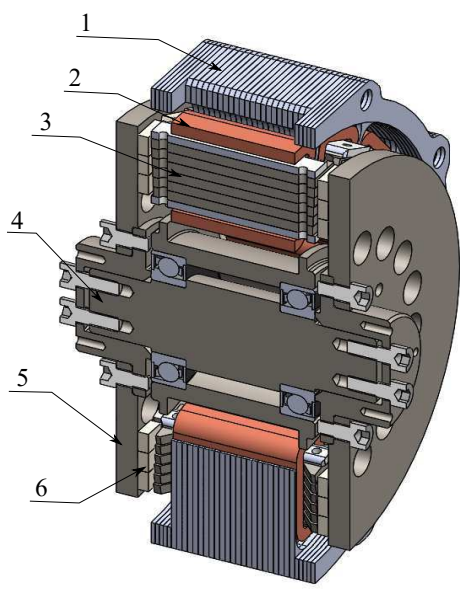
Cross-section view of the YASA machine: (1) Housing, (2) Winding, (3) Core, (4) Shaft, (5) Rotor Disc, (6) PMs.
